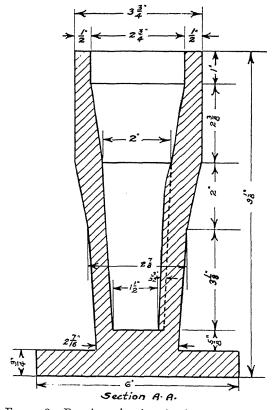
Drawings showing the form and dimensions of the standard mold for taking the ladle test.
